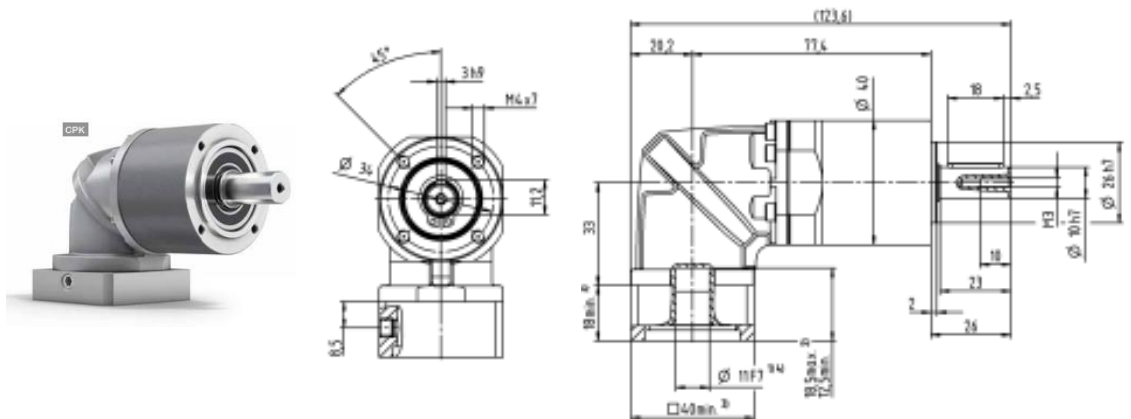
CAD drawing of the CPK 005 MF gear train
